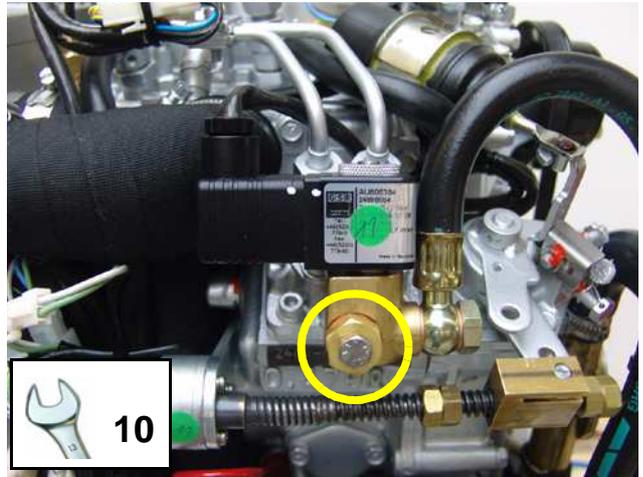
Ventilation screw - fuel solenoid valve
